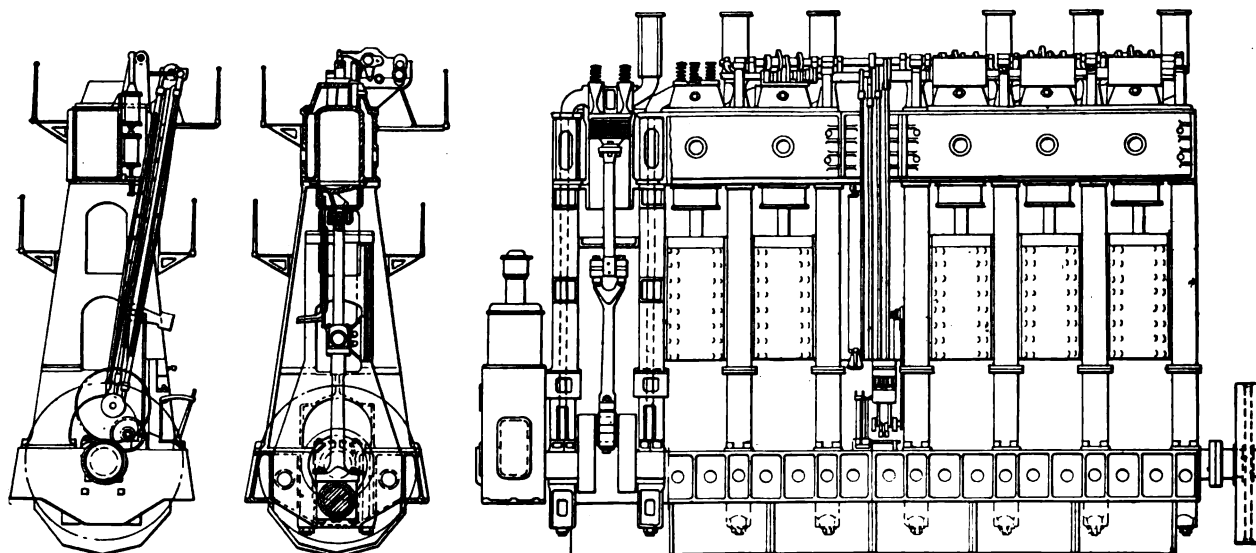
A 2000-I. HP. WERKSPEER ENGINE BUILT IN THE UNITED STATES AND HAVING CAST-IRON A-FRAMES EXTENDING FROM THE UNDERSIDE OF THE CYLINDER BOXES TO THE BEDPLATE INSTEAD OF THE STEEL COLUMNS AND DIAGONAL TIERODS OF THE ENGINE SHOWN IN FIG. 4 OR THE COMBINATION FRAME AND COLUMN ARRANGEMENT ILLUSTRATED IN FIG. 6
